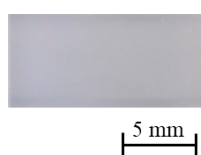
Photograph of fracture surface of PP plate.
